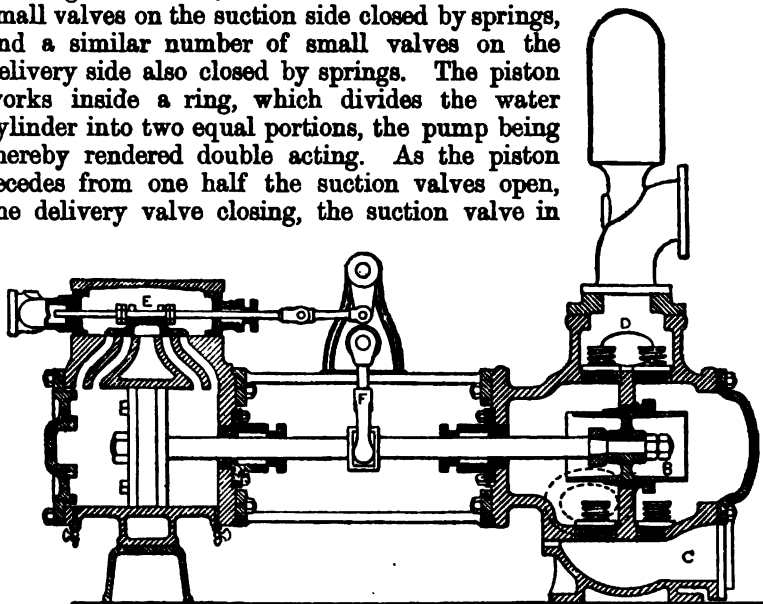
Sectional View of Worthington Plunger and Ring Pump. The Steam Cylinder is shown on the Left, the Water Cylinder on the Right, and the Vibrating Arm which works the Steam Admission Valve in the Centre.
